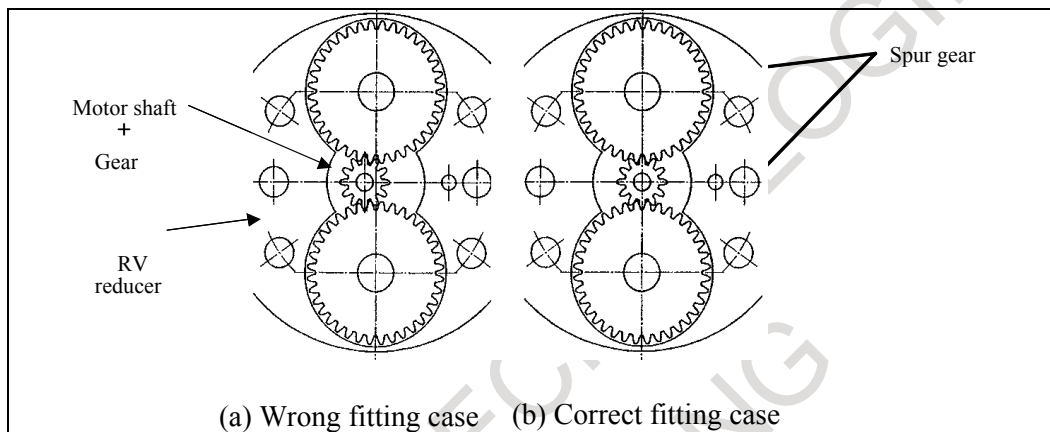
(d) Attaching J3-axis motor to reducer
